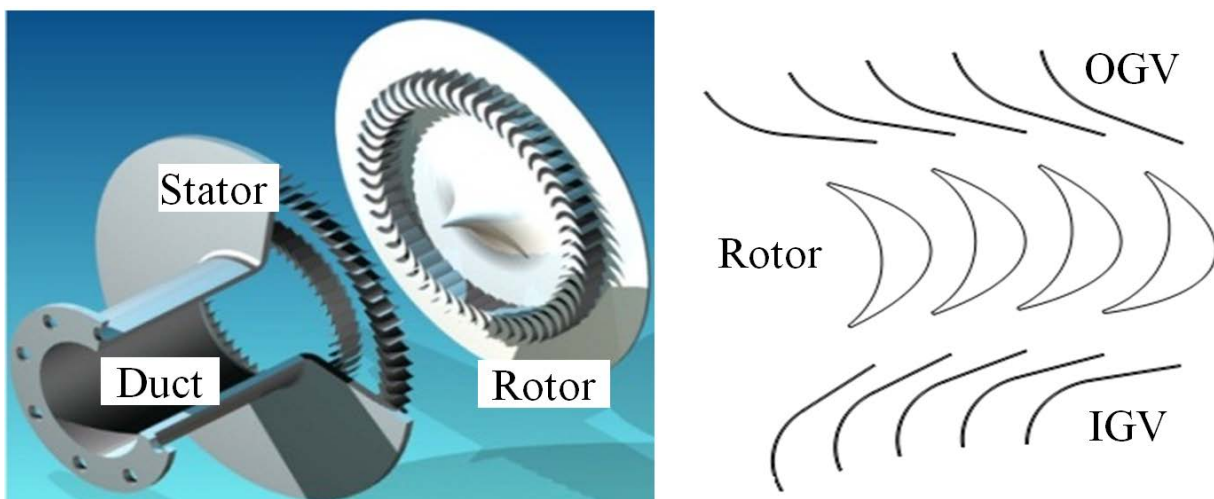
Rotor and stator of radial impulse turbine [10]-[19].
